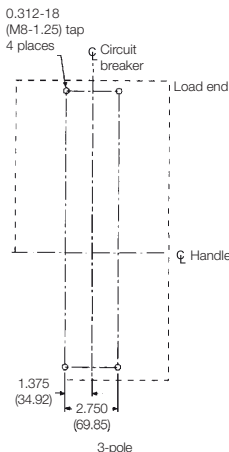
breaker mounting bolt drilling plan - 800 A, 1200 A circuit breaker
